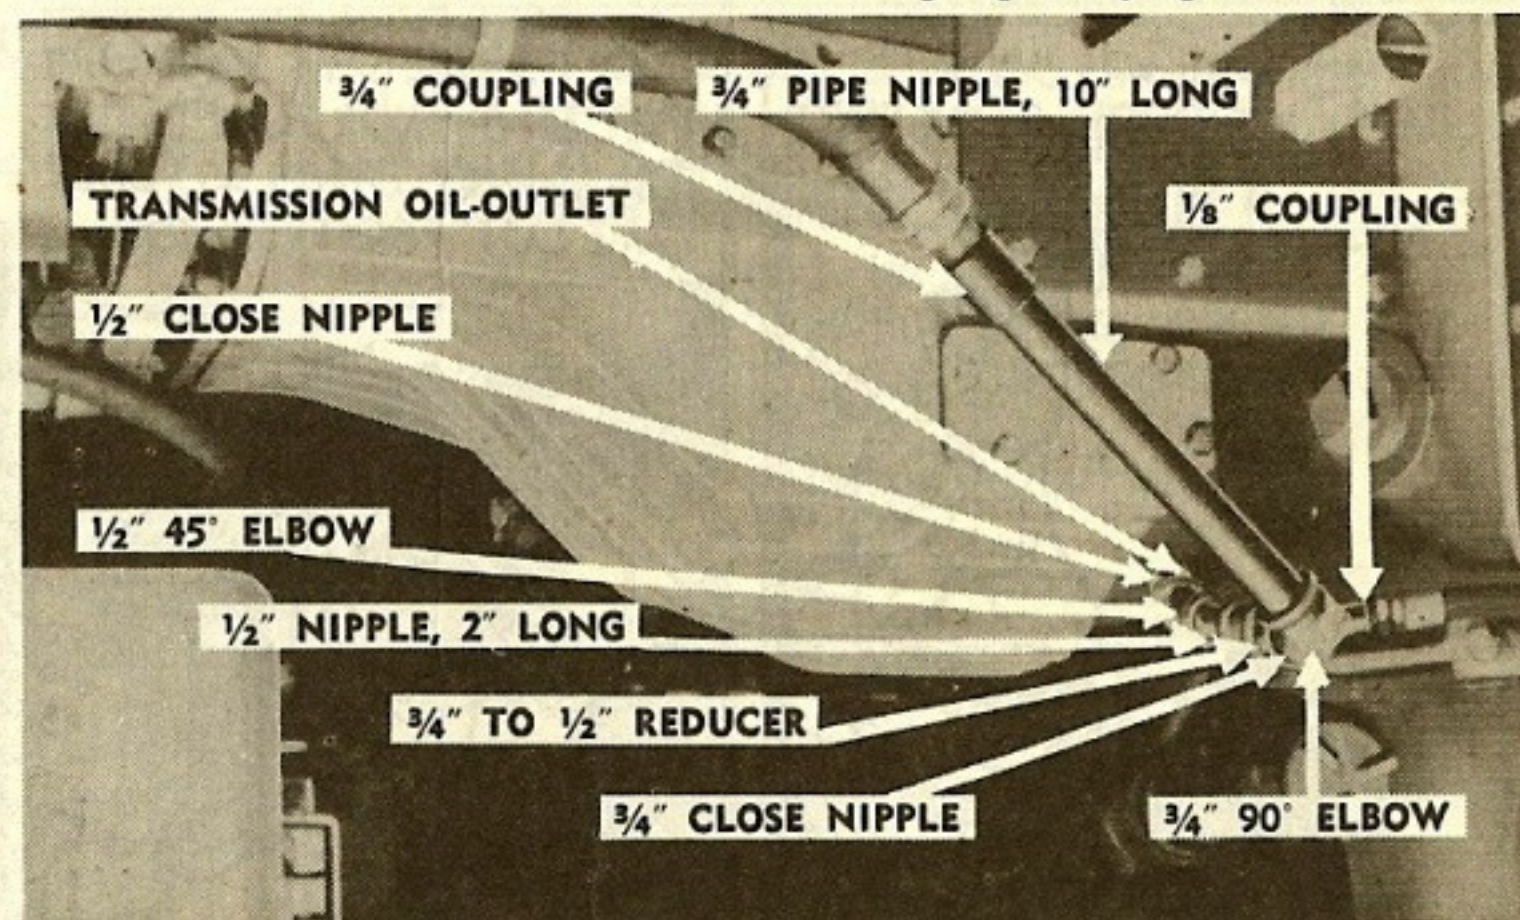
These connections'll extend the long hose so it'll reach from the transmission oil-outlet to the cooler inlet.
